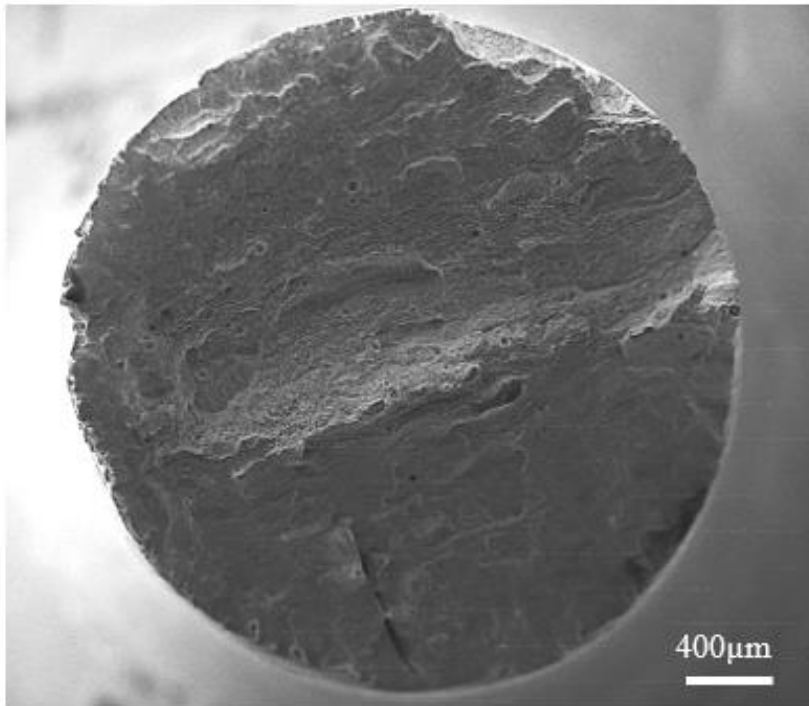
SEM images of 90T tension test specimen fracture surface
